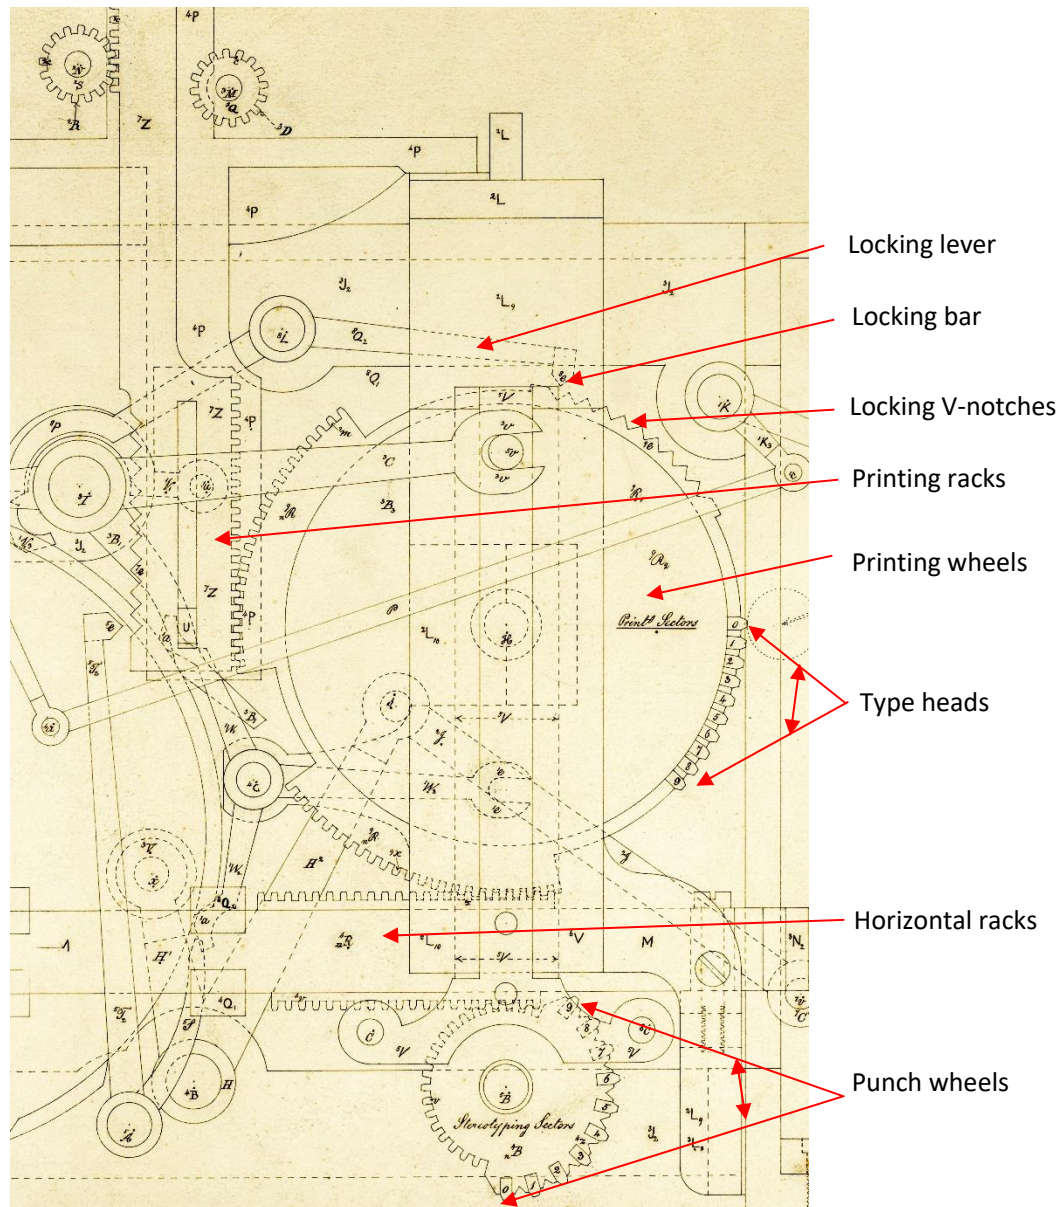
Printing wheels and racks (A/172) (detail).
